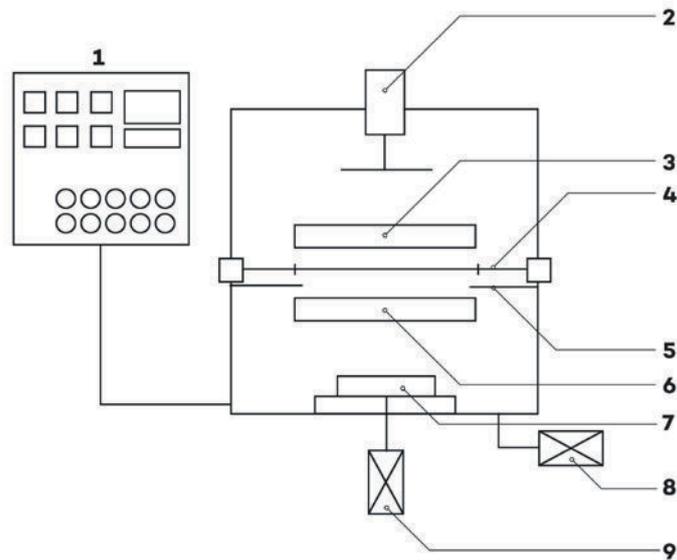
Schematic of a vacuum-forming machine: control box (1), plug assist ram (2), top heater (3), clamping frame (4), window sheet (5), lower heater (6), mold table with mold (7), compressed air (8), vacuum (9).
